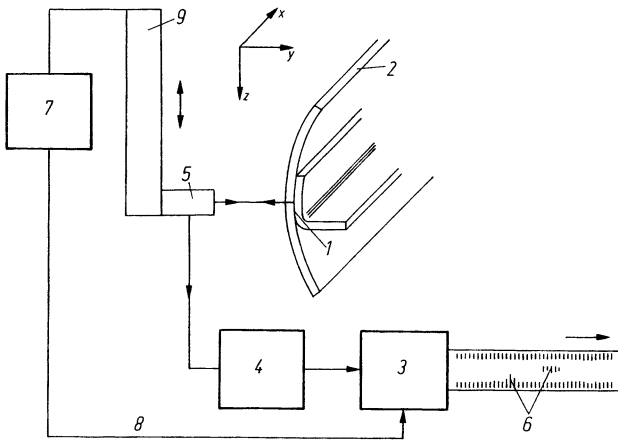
Testing of car bumpers (design Wells-Krautkrämer). 1 welded stiffener, 2 bumper bar, 3 line recorder, 4 flaw detector, 5 probe, 6 non-bonded areas of the weld in the record, 7 analog/digital converter, 8 recording signal, 9 mechanically oscillating probe guide
